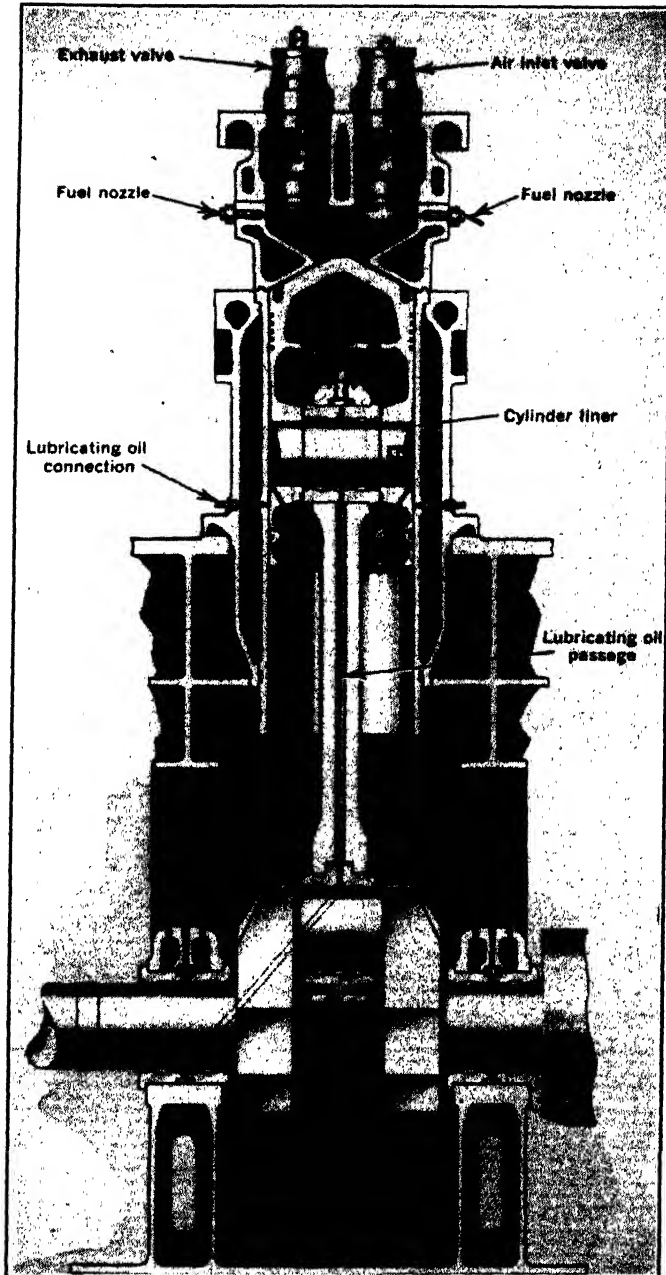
Section of cylinder, De La Vergne four-stroke cycle solid-injection Diesel engine.
